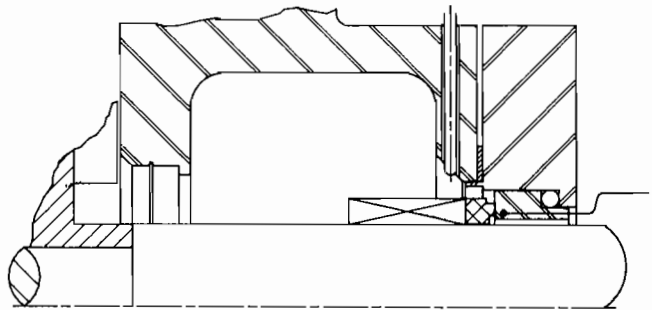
Enlarged Cylindrical II Seal Chamber, Pump A.
